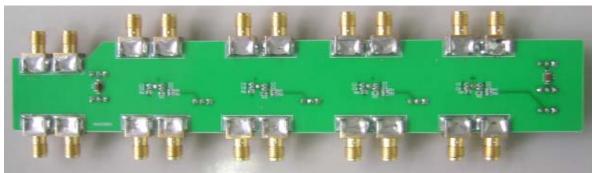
Bottom view of PI2DBS6212ZHE Eval board
